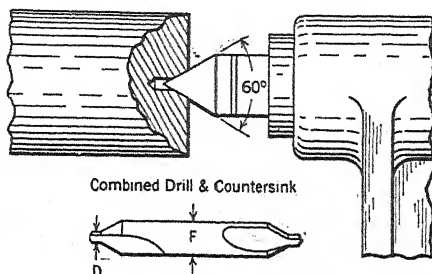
Combined Drill and Countersink with Work Properly Mounted on a Center.
